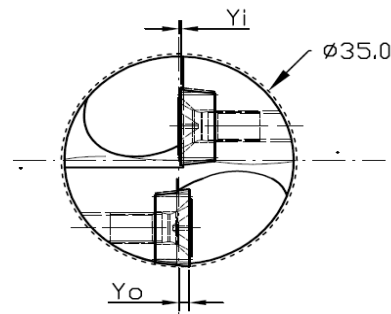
Front View of ‘U’ Drill Body with Carbide Insert Mounted on it.
